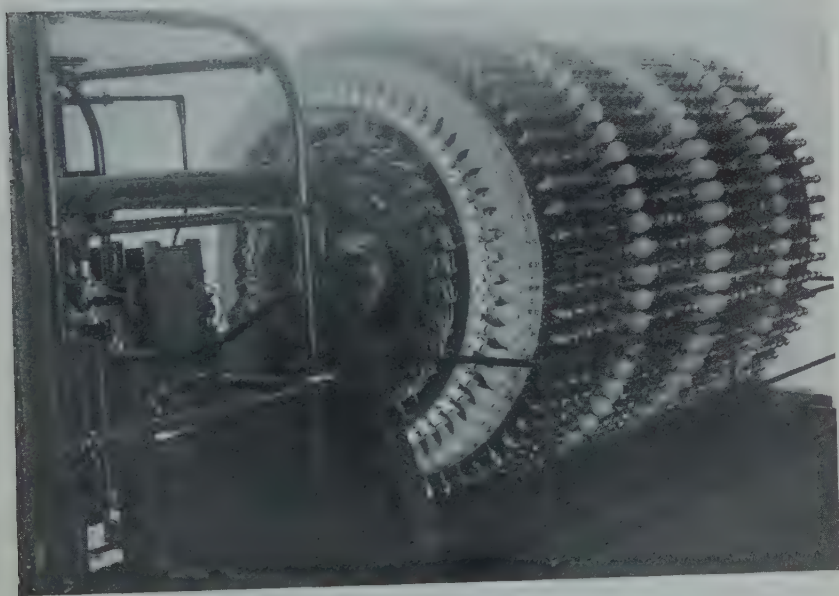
Seasoning drum used in connection with the high-speed automatic test machine.
